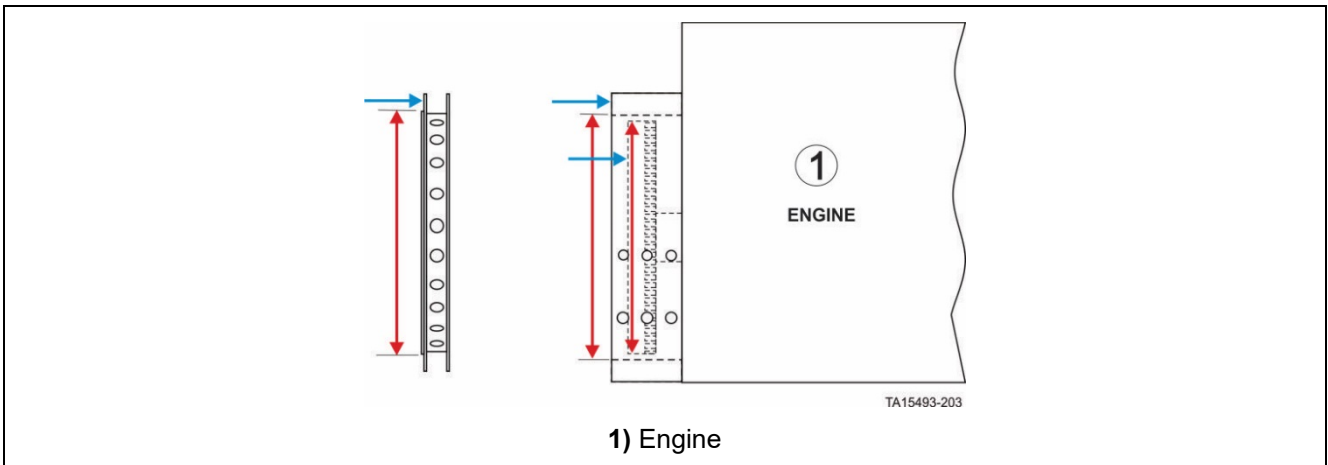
Measure diameter on rotor adapter and flexplate - (2 of 2)
